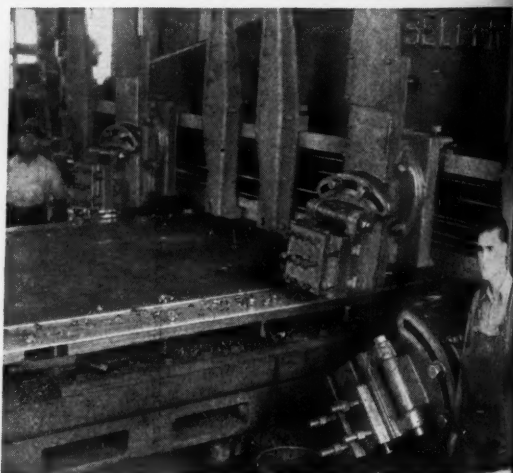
The size of the machine and work can easily be estimated from this photograph. The machine is equipped with all the latest types of electrical controls.
